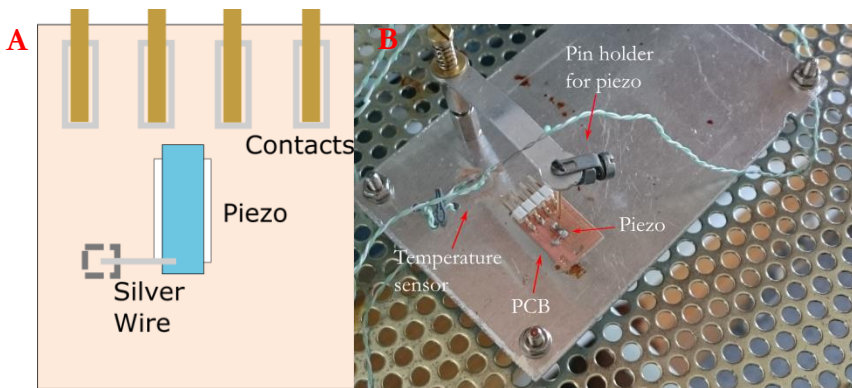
A) A simple illustration of the PCB and the components. The silver wire contacts the back of the piezo and piezo is soldered directly to the PCB. The air backing is situated directly below the piezo. The contacts are for driving the transducer and performing various measurements. B) A fixture was used for making sure the piezo didn't drift during soldering and to record the temperature in the oven during soldering. The holder is resting on the bottom of the tray of the solder oven
